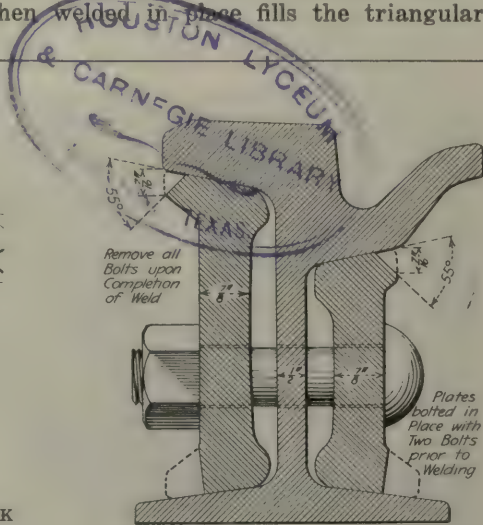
CROSS-SECTION JOINT READY FOR ARC WELDING
